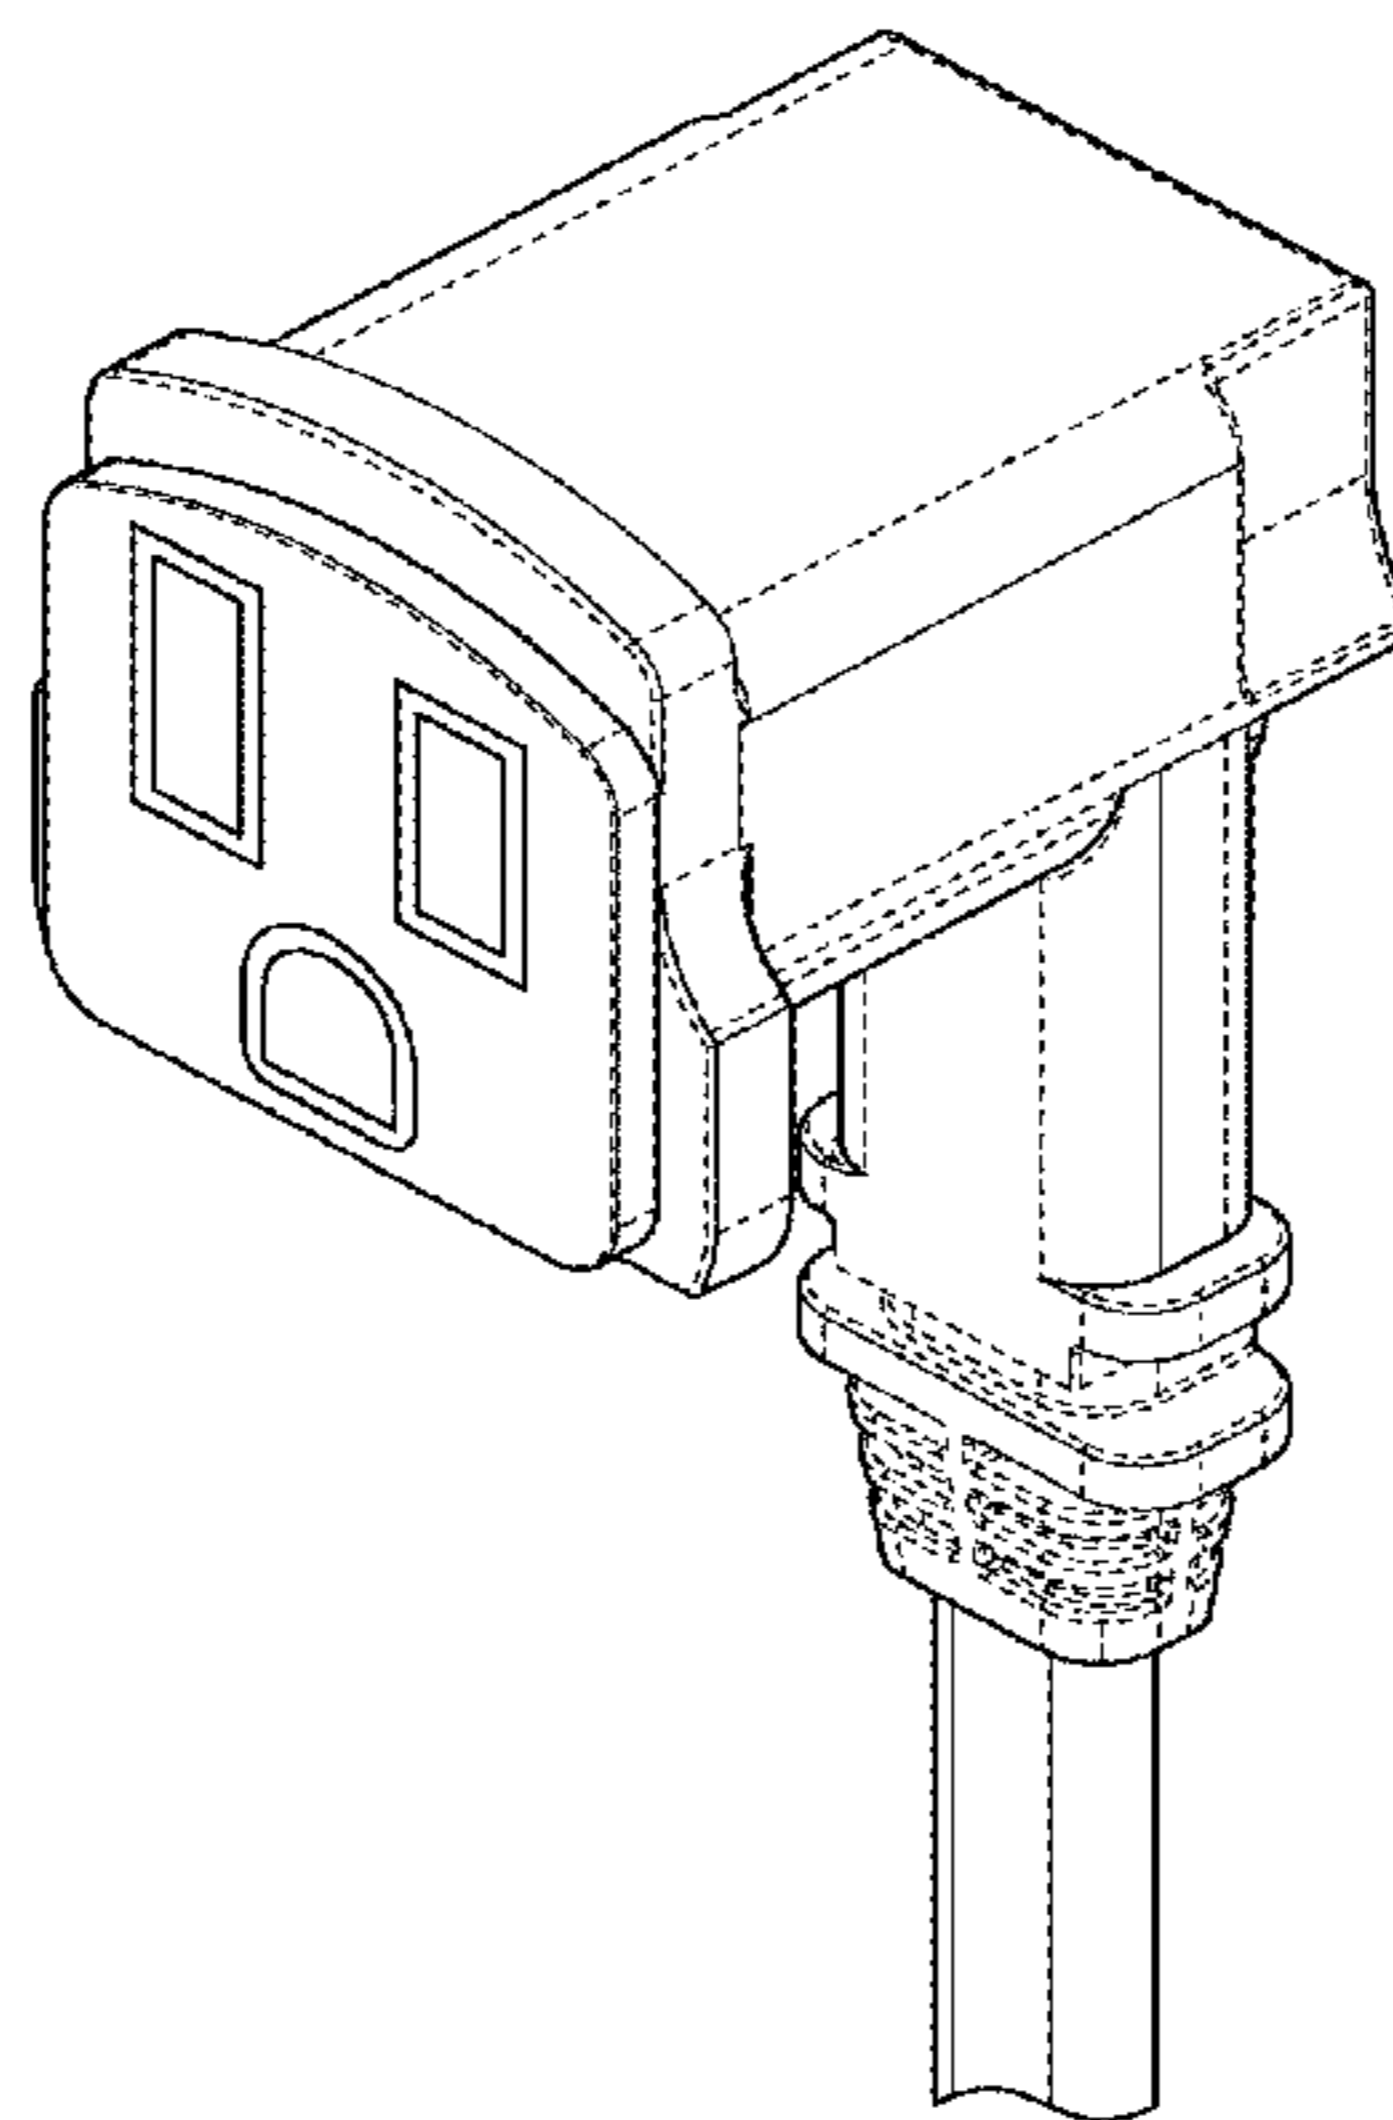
is a front, top, right side perspective view of a first embodiment of the electrical connector, showing our new design;
